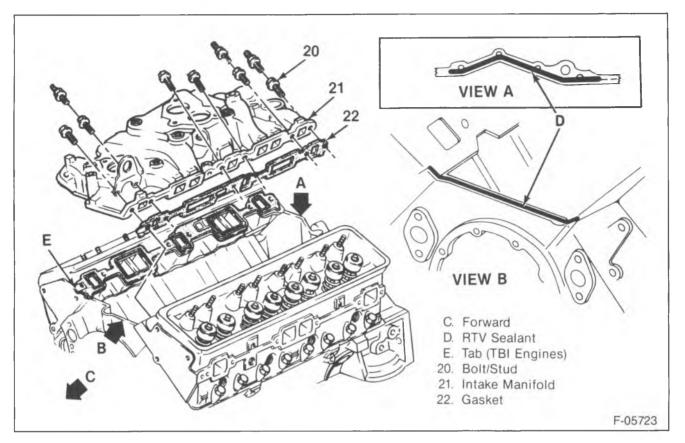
Intake Manifold (5.0L and 5.7L Engines)
